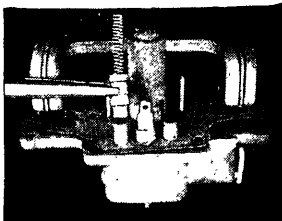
Install vacuum piston and pin, and vacuum piston spring in piston link
